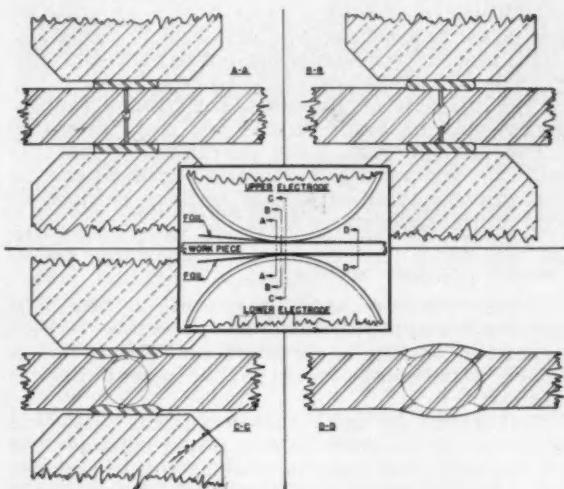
Sketches show the position of component parts and progress of fusion with the foil seam resistance welding process.
